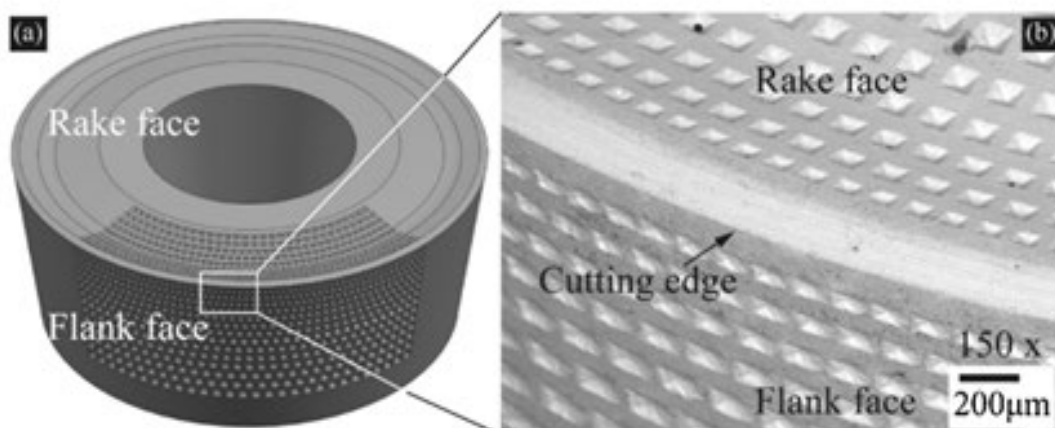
Illustration of a laser modified flank and rake face of the cutting insert; and (b) magnified SEM micrograph of the cutting edge showing the pyramid shaped micro patterns [134]
